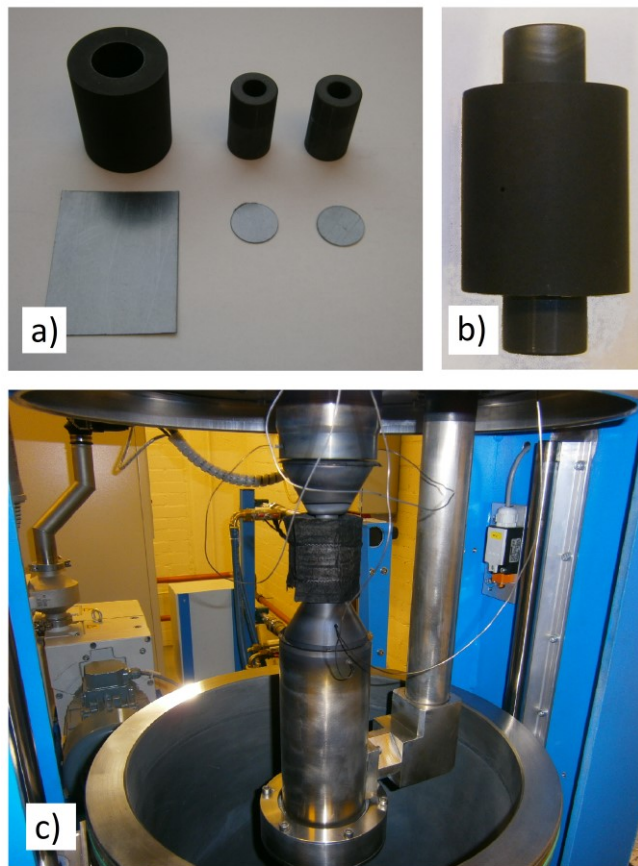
a) The graphite mold before assembly: The hollow body, the punches, and the pieces of graphite foils protecting the interior of the mold). b) The assembled mold. c) The assembled mold placed between graphite cones and electrodes inside the process chamber of the PECS equipment.
